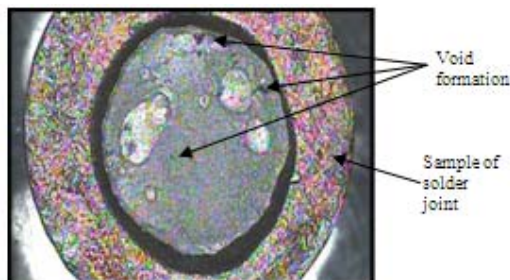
Surface fracture of Sn-25Ag-10Sb solder joint soldered at temperature of 435 °C under 5 days thermal aging treatment.
